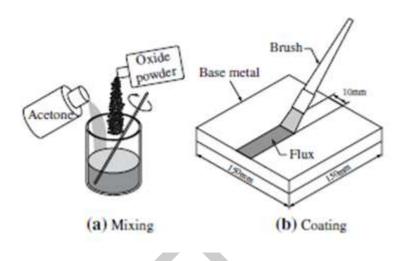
Schematic diagram of GTA welding with activating flux
